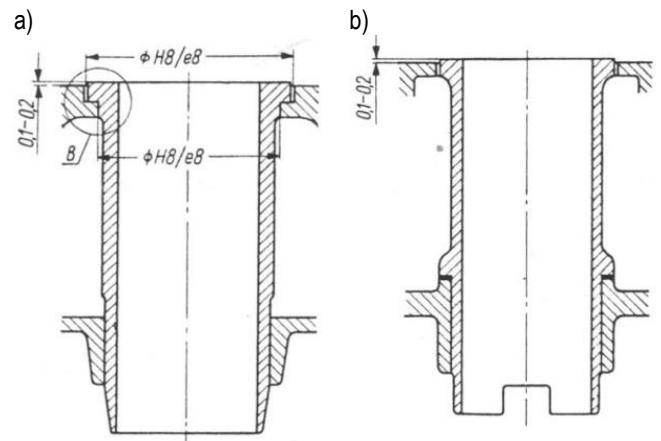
Wet piston sleeves: a) piston sleeve with upper flange, b) piston sleeve with bottom flange (Wajand and Wajand, 2005)
